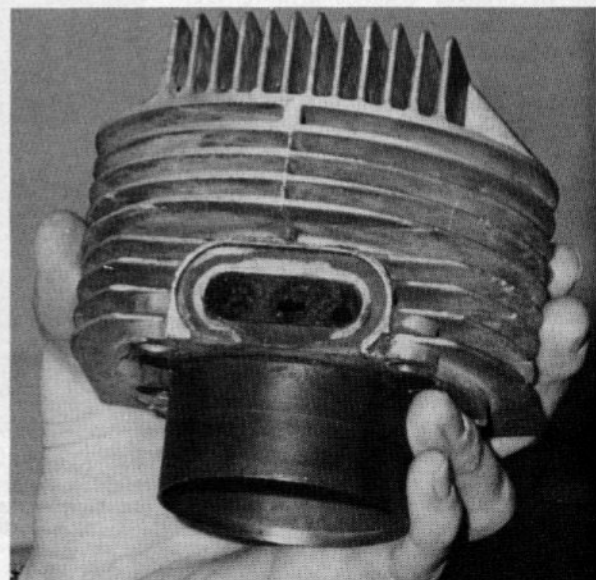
Example of severe case of port carbon. Carbon must be removed to restore performance.
